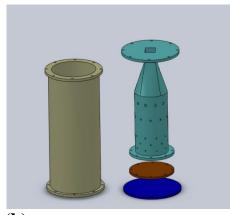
Drawing showing the combustor assembly and its dimensions
